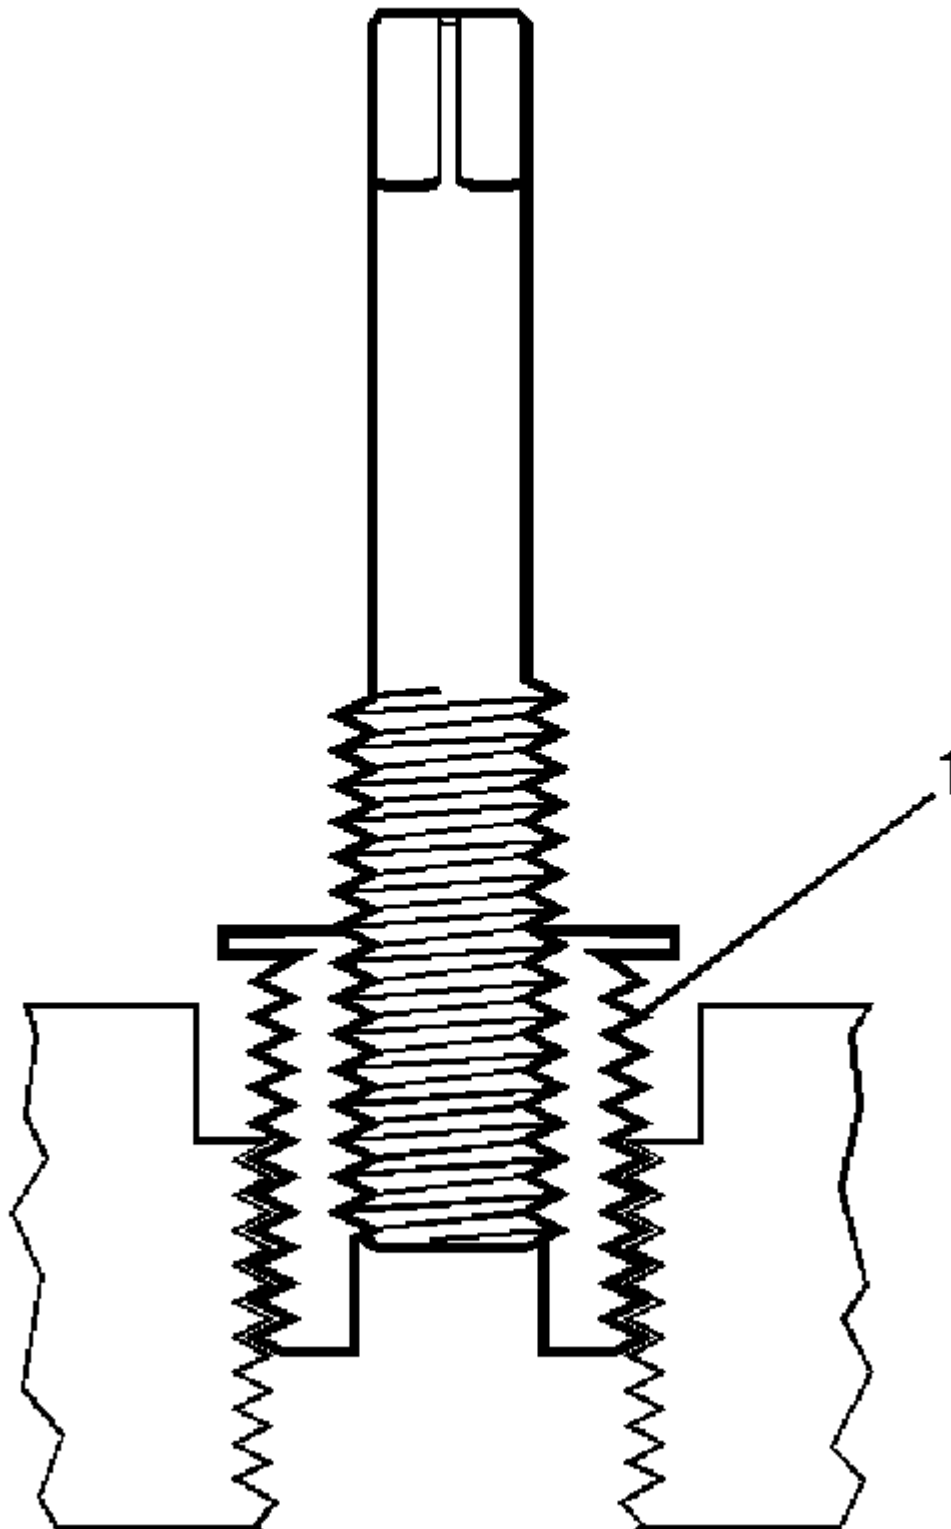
Identifying Insert & Driver Installation Tool
